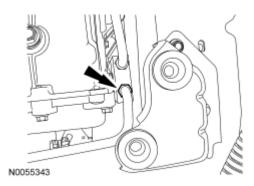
Identifying Vacuum Hose From Upper Intake Manifold Courtesy of FORD MOTOR CO.
